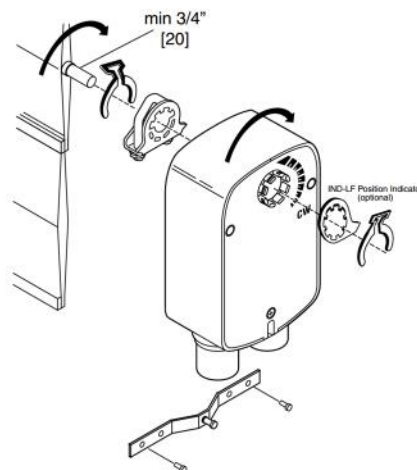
FIGURE D – Standard Mounting (Dimensions in Inches [mm])
